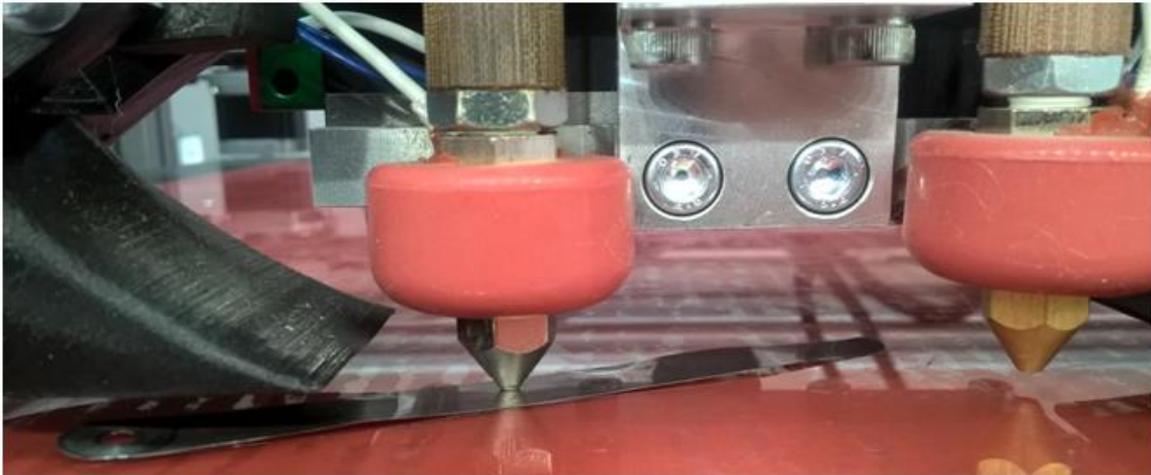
Using the 0.10 mm feeler gauge, adjust the distance between the nozzle and the table
